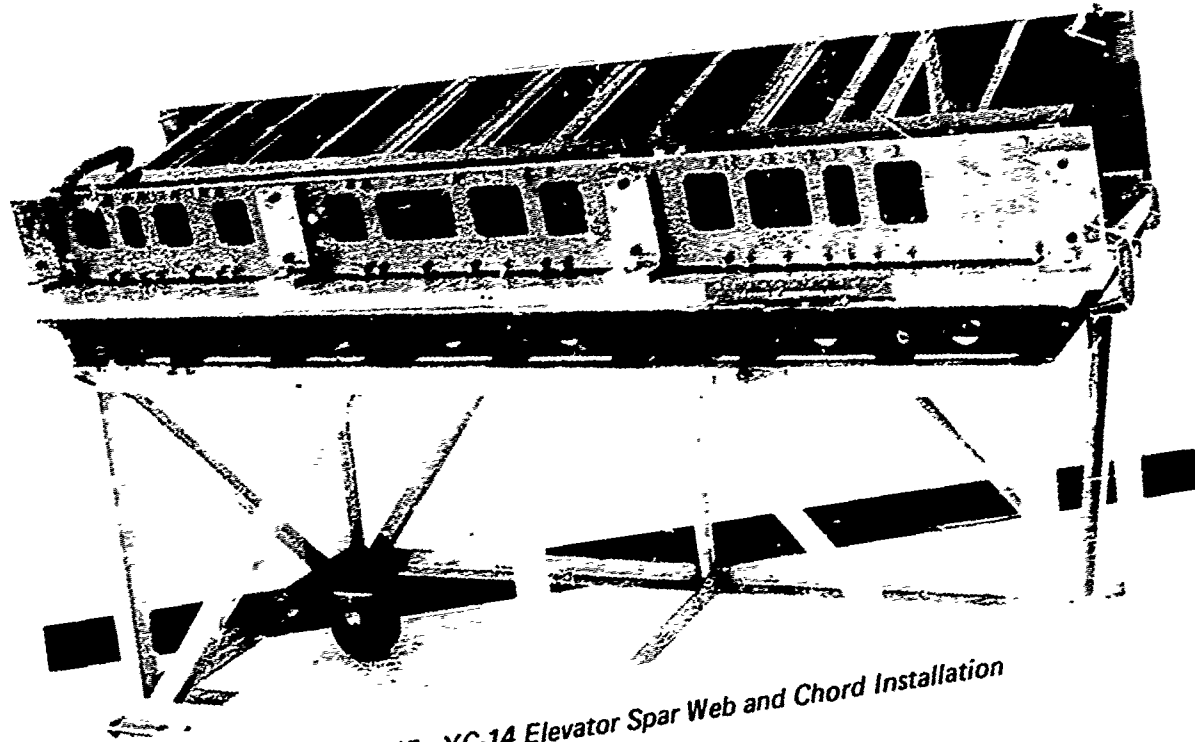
YC-14 Elevator Spar Web and Chord Installation
